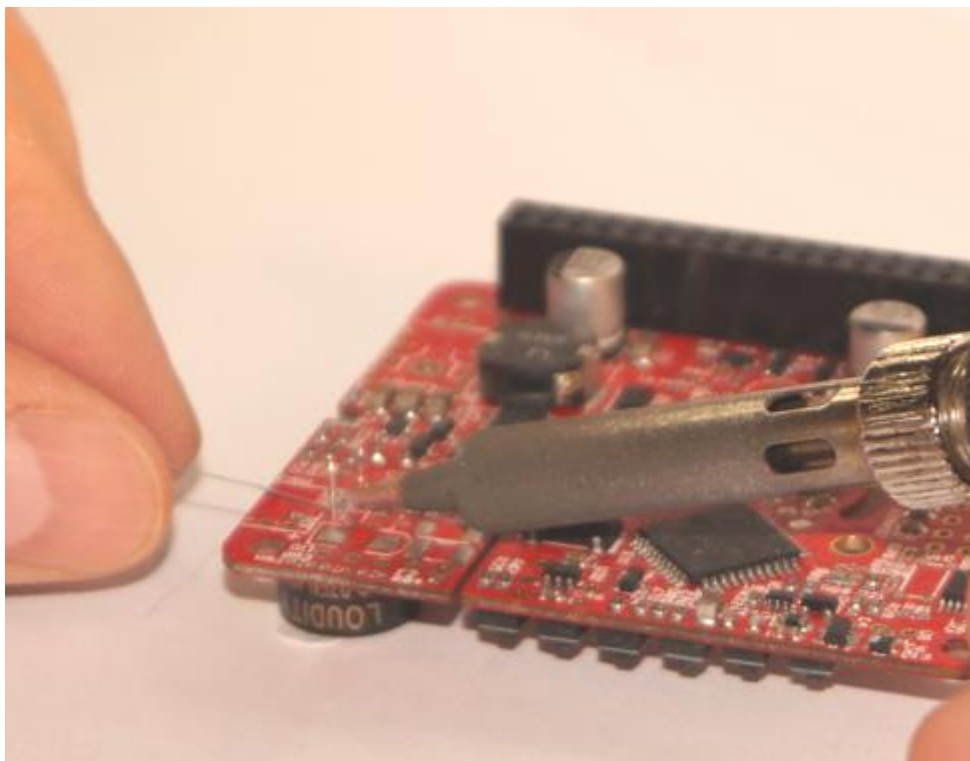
Flip upside down the PCB and solder the pins, then cut the outstanding legs
